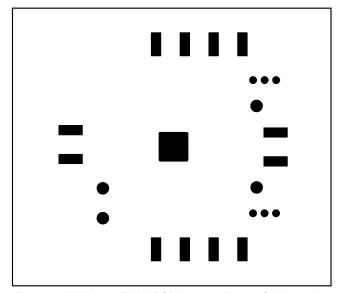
MAX2023 EV Kit PCB Layout—Bottom Soldermask
